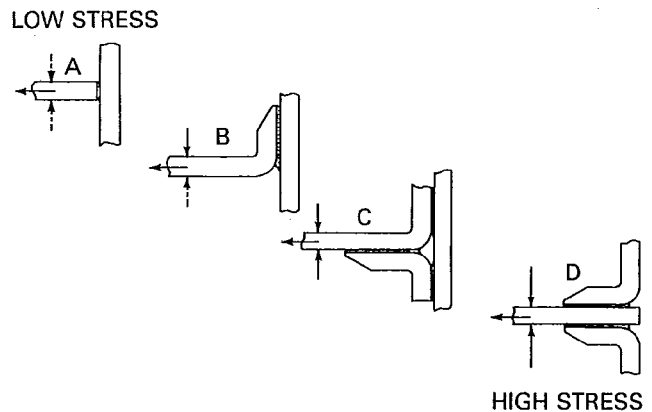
T-joint Designs for Sheet Metal Brazements
